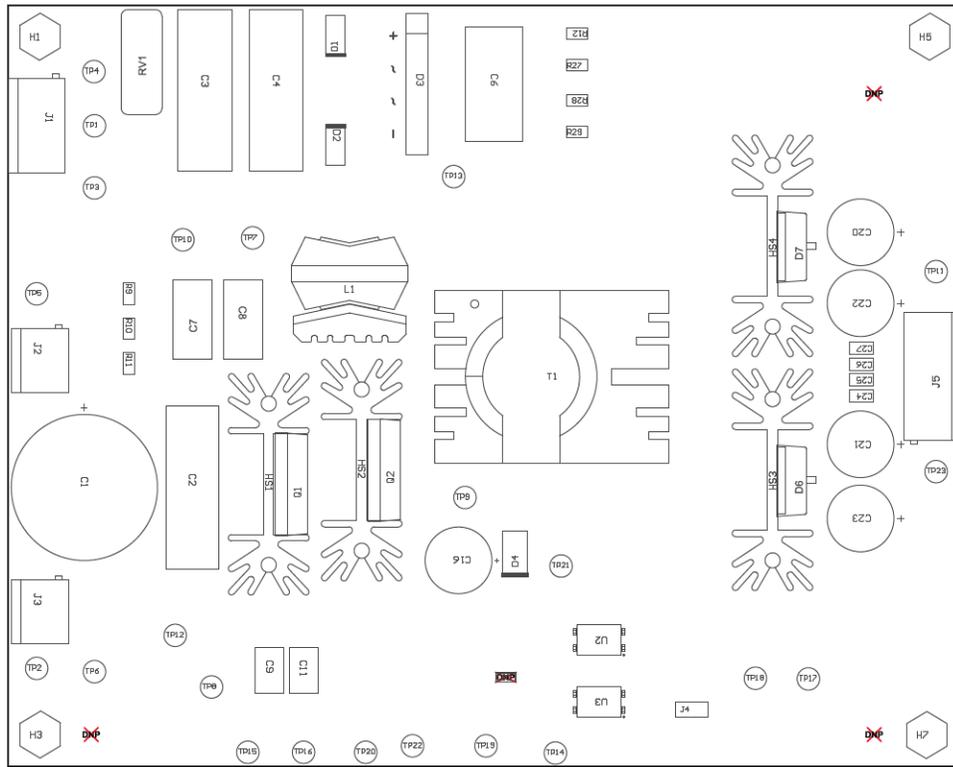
UCC25630-1EVM-291 Top Layer Assembly Drawing (Top View)
